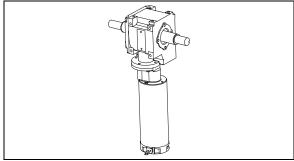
ELECTRIC MOTOR AND SPEED REDUCTION GEARBOX
